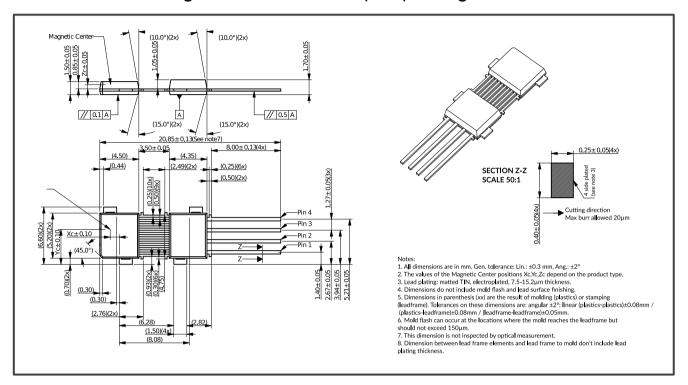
DMP-4 Straight Leads Package Outline Drawing
